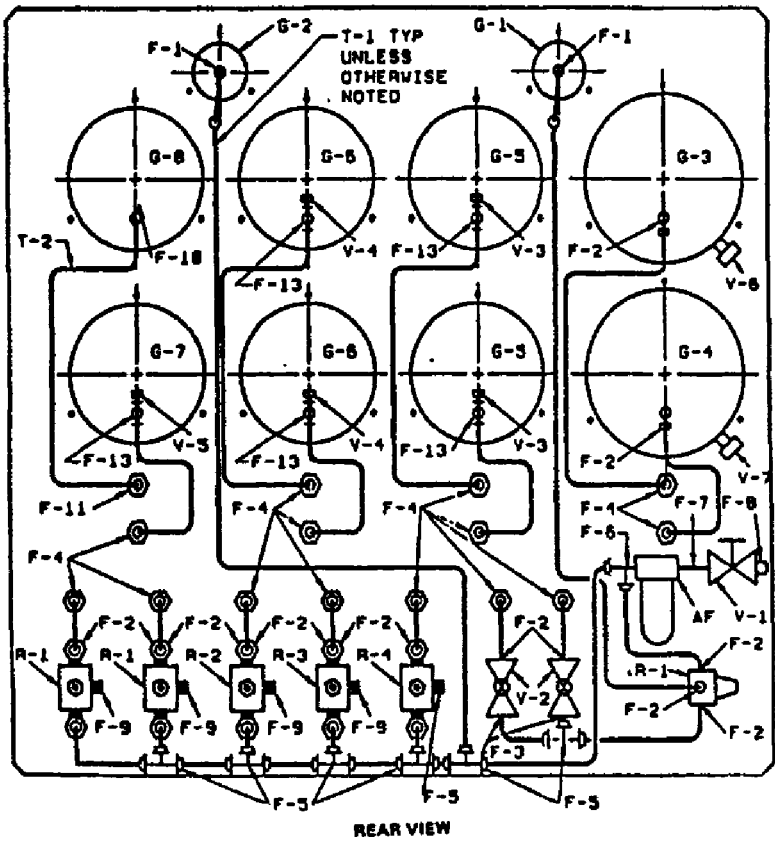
Automatic Combustion Control Calibration Panel Drawing (Sheet 5 of 13)
